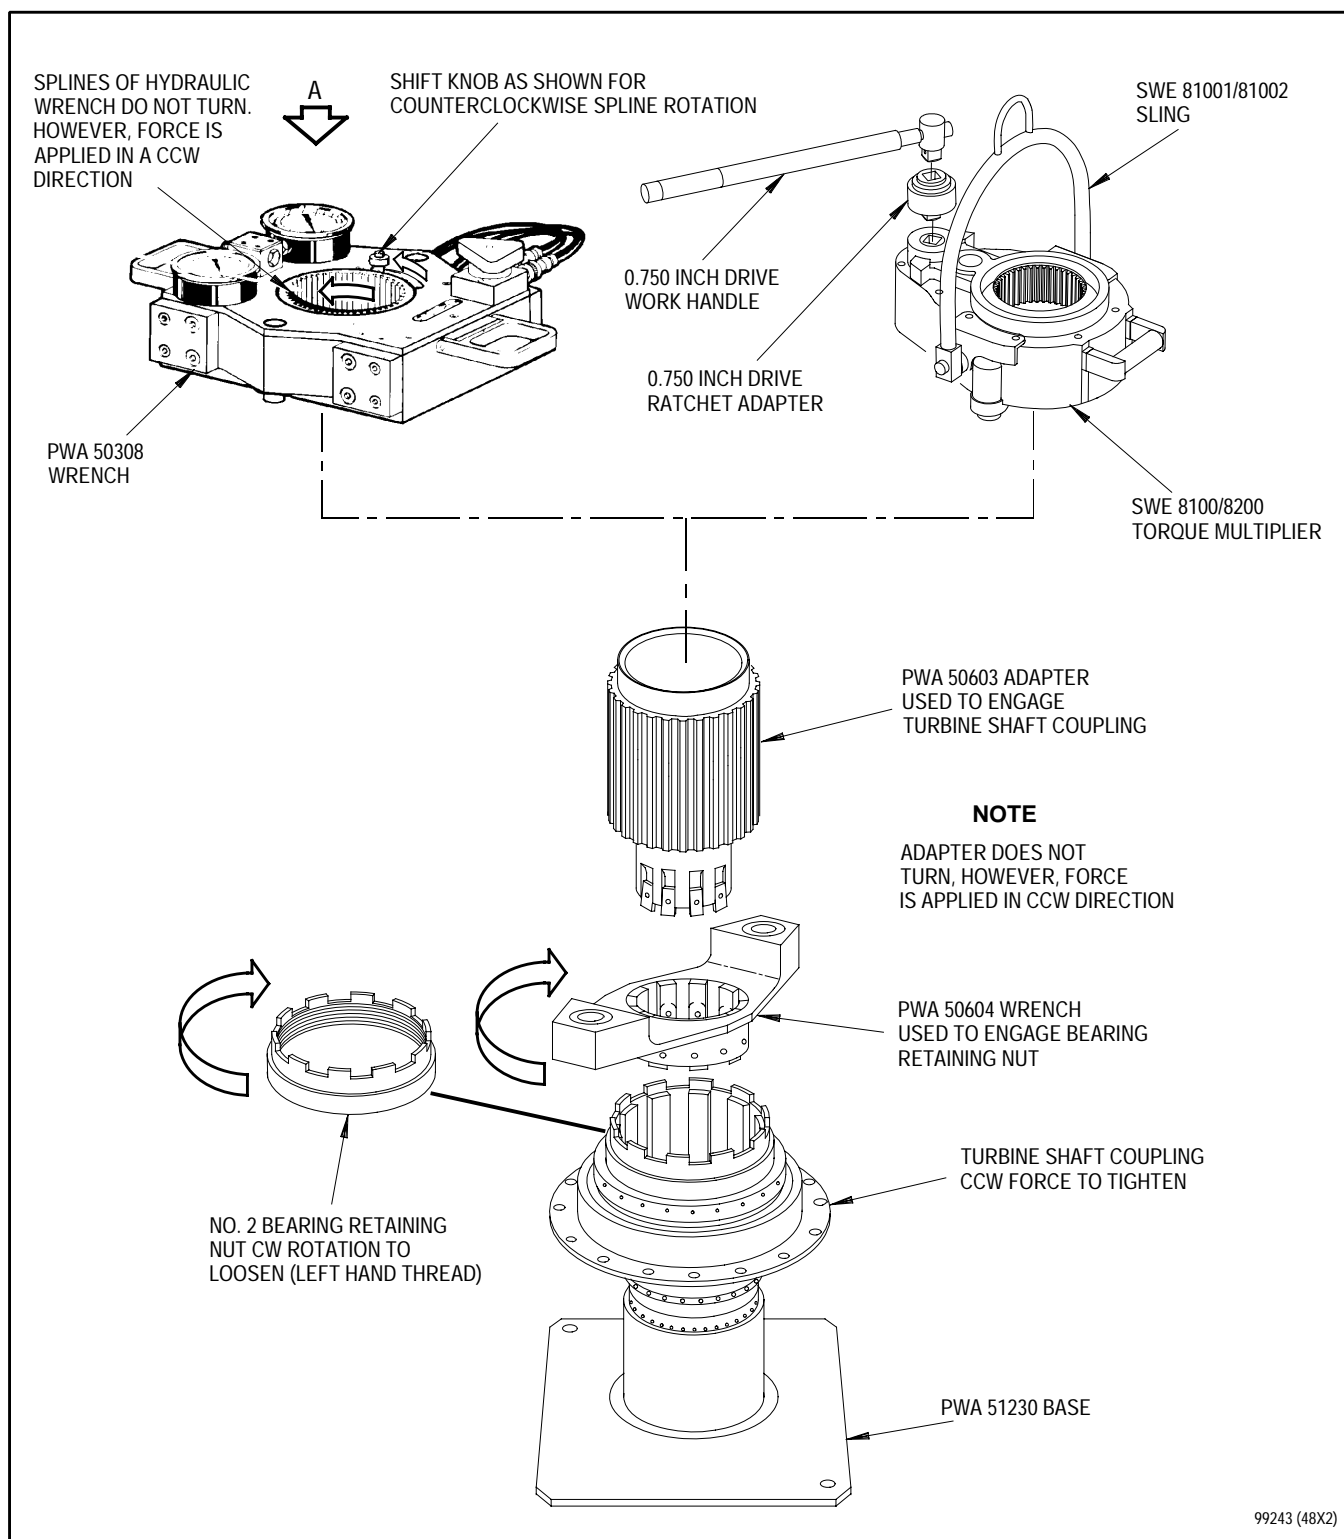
No. 2 Bearing Retaining Nut - Removal (Sheet 1 of 2)
